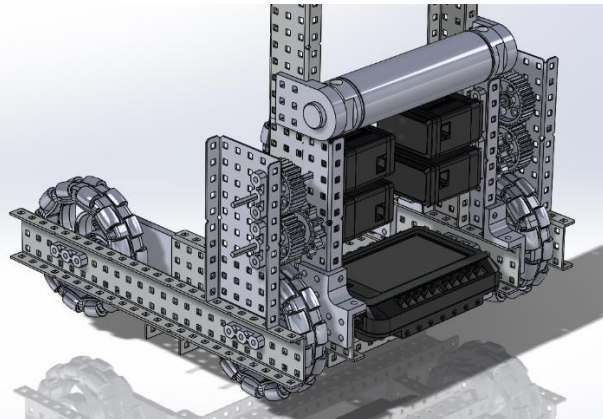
CAD Drivetrain Prototype Rear Three-Quarters
